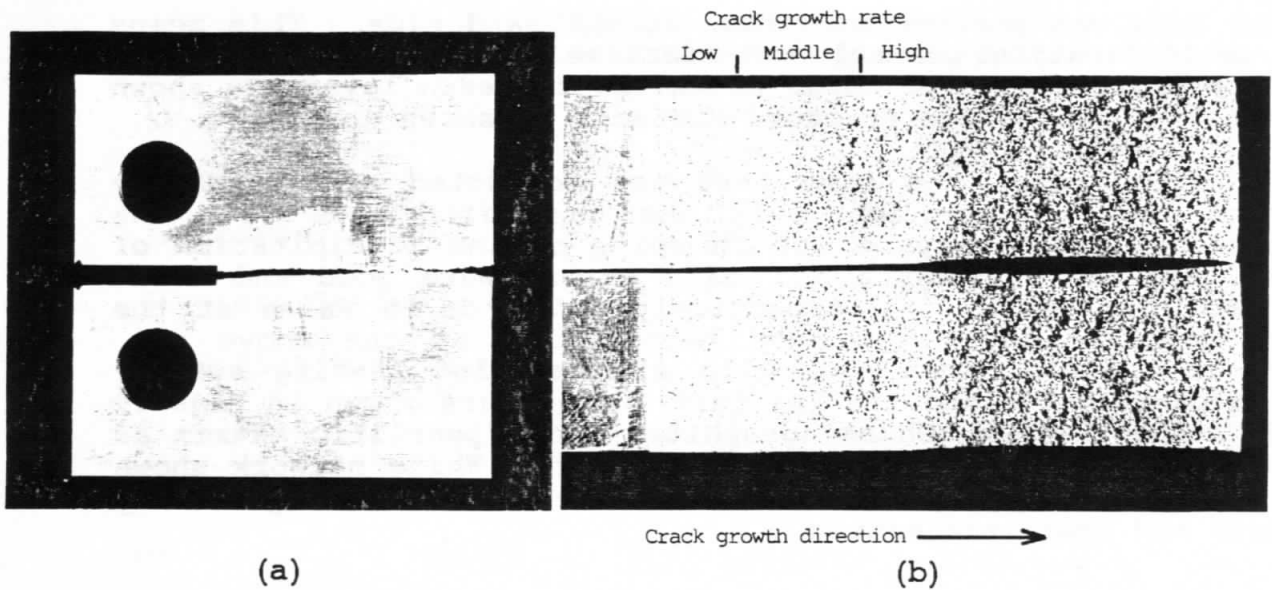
One Inch 5TCT Specimen for Fatigue Crack Growth Rate Test (Chiller Side Shown in FIG. 17); (a) Crack Growth Behavior, (b) Fracture Surface.
